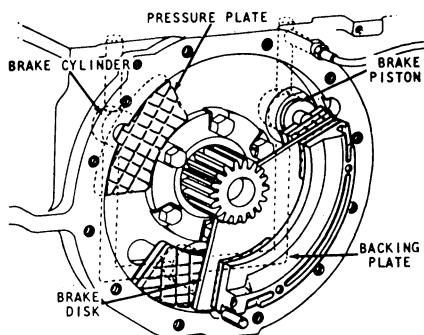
Schematic view of assembled brake unit located on differential output shafts in transmission housing.
